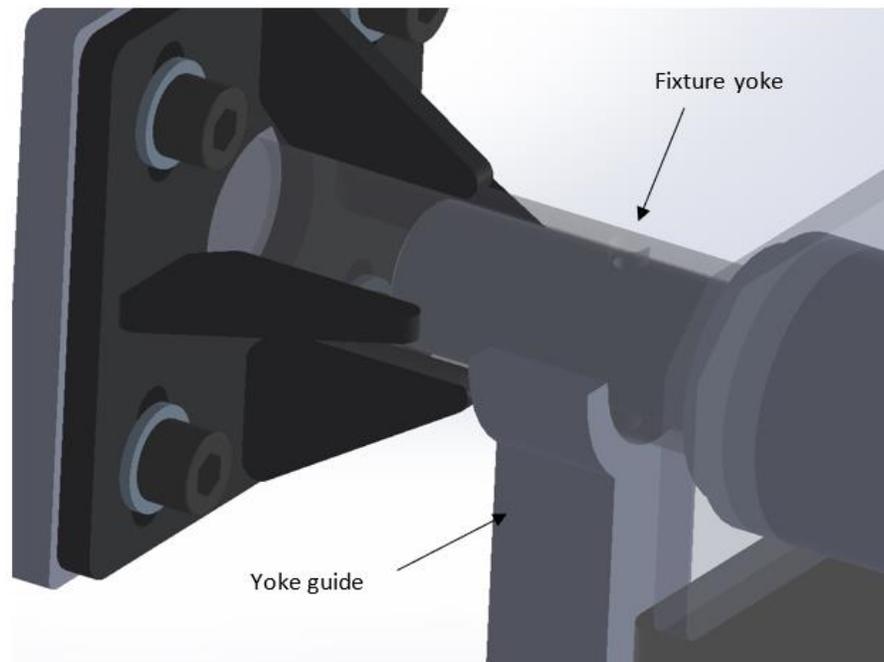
The Coupling of Fixture Yoke and Shaft with the Yoke Guide
